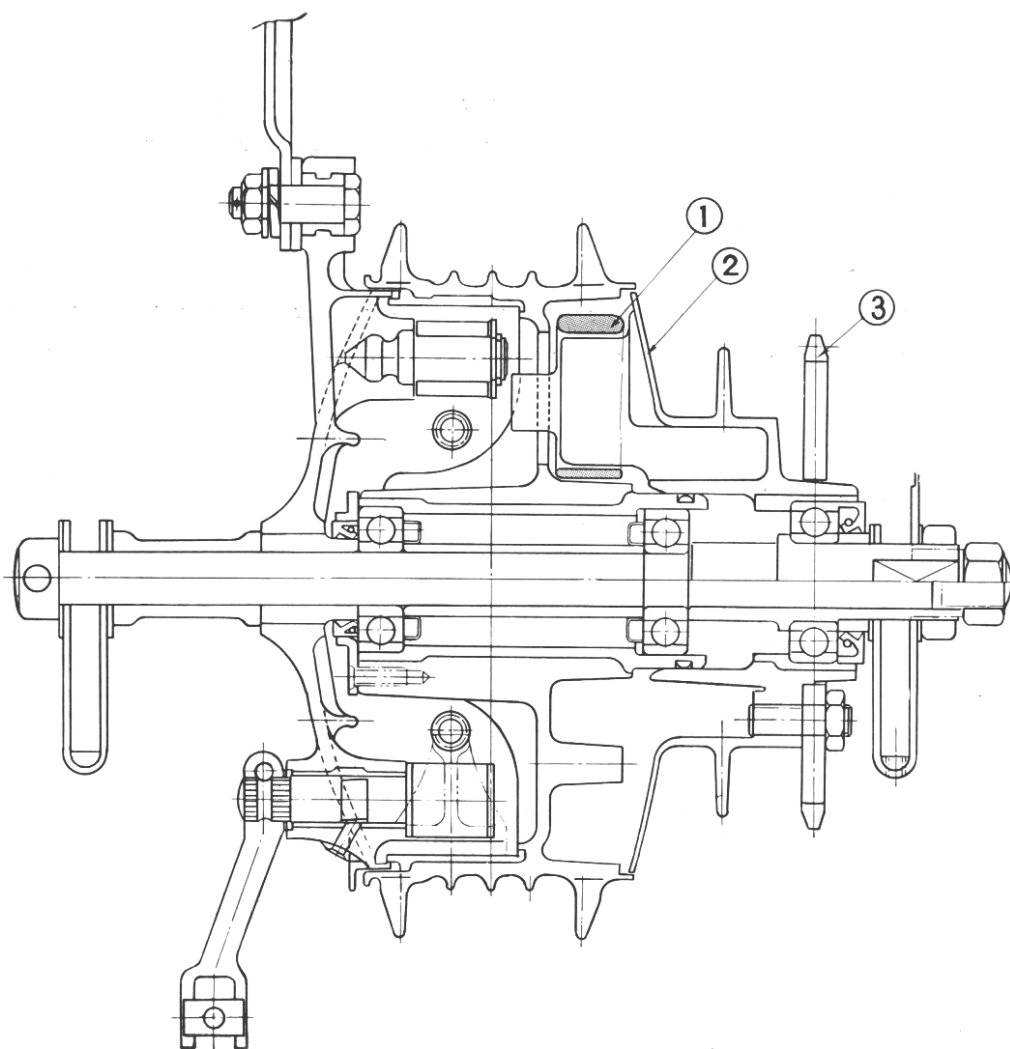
To draw out the rear wheel from the frame (Model CB72, 77)
